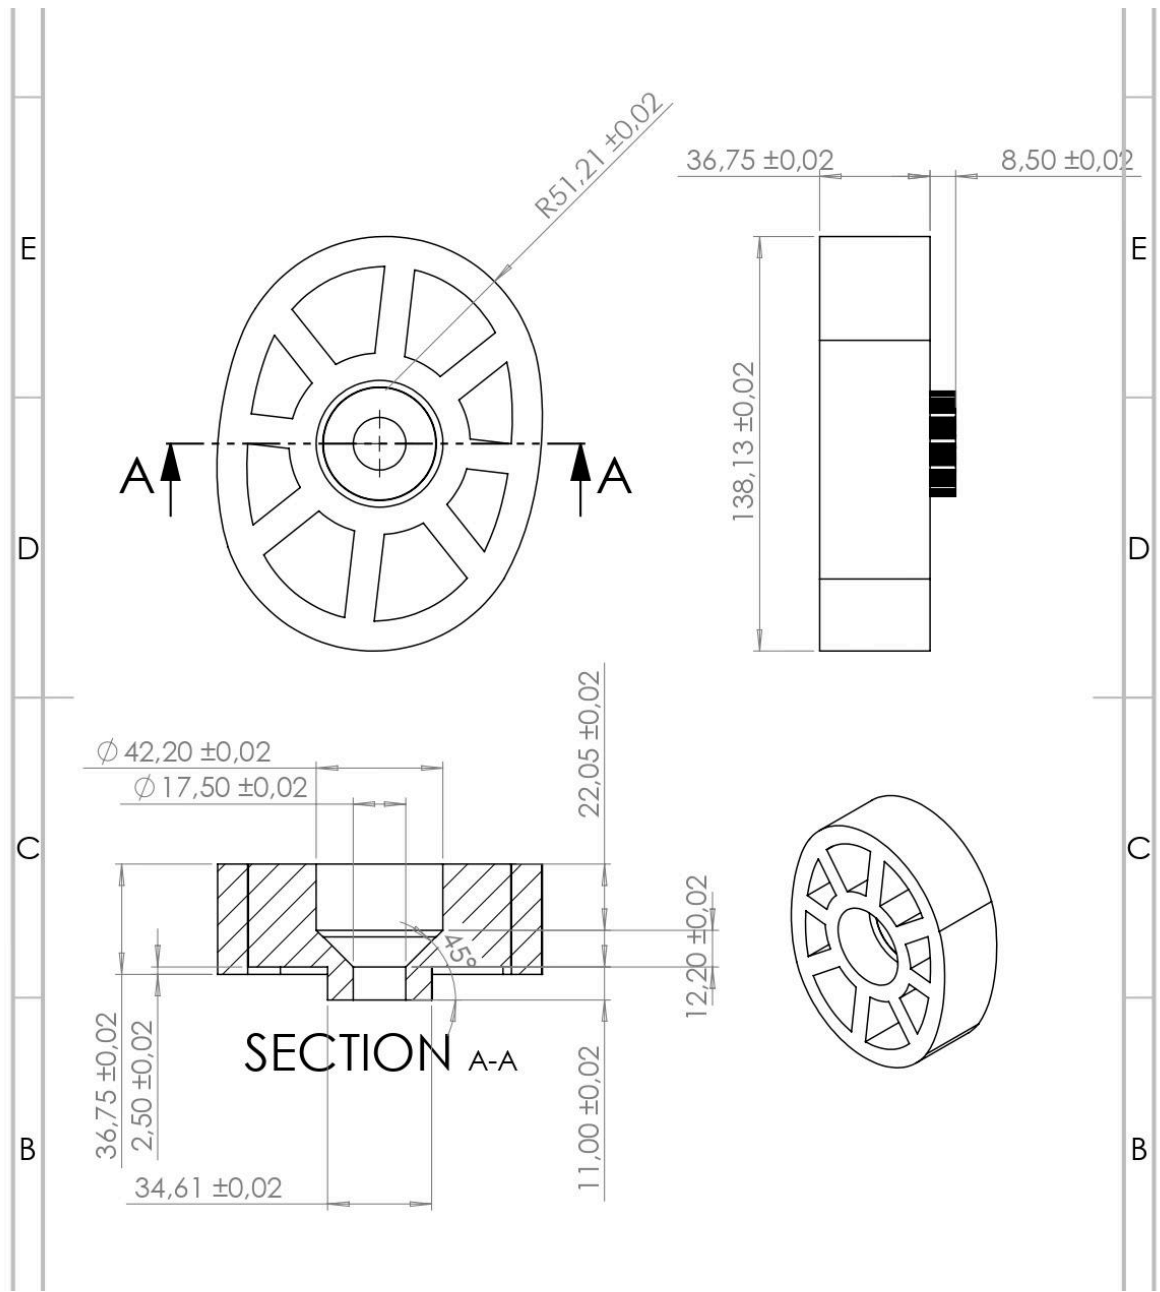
3D printed LiquidPiston Engine rotor drawing
